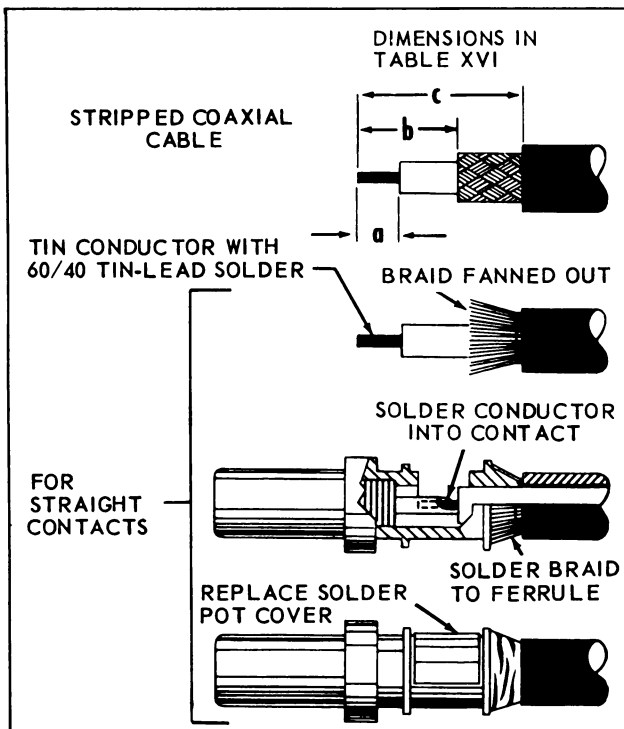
(1) Soldering Coaxial Cable to Contacts for DPD Connector
